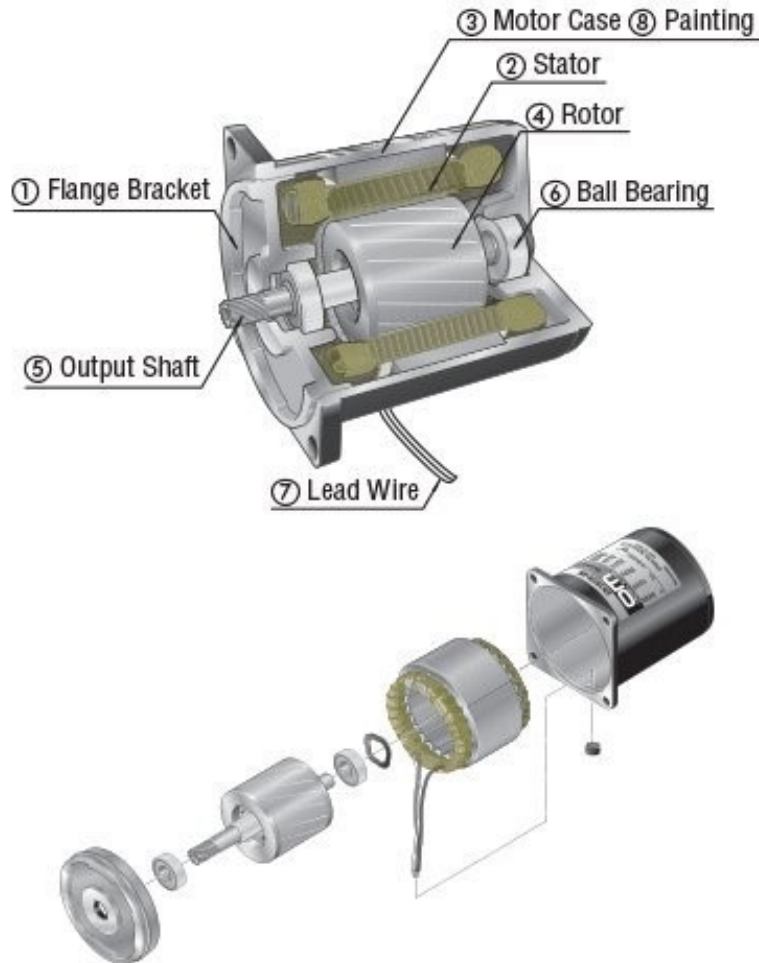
Exploded view of Induction motor (Karthik, 2019)
